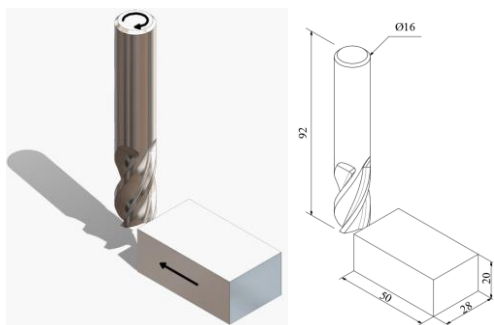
The three-dimensional end mill and workpiece models with dimensions.
